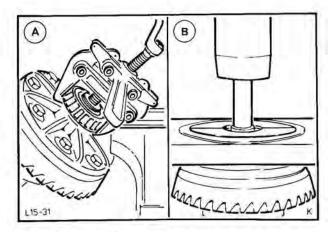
Remove differential housing taper roller bearing using special tool 15–026A
